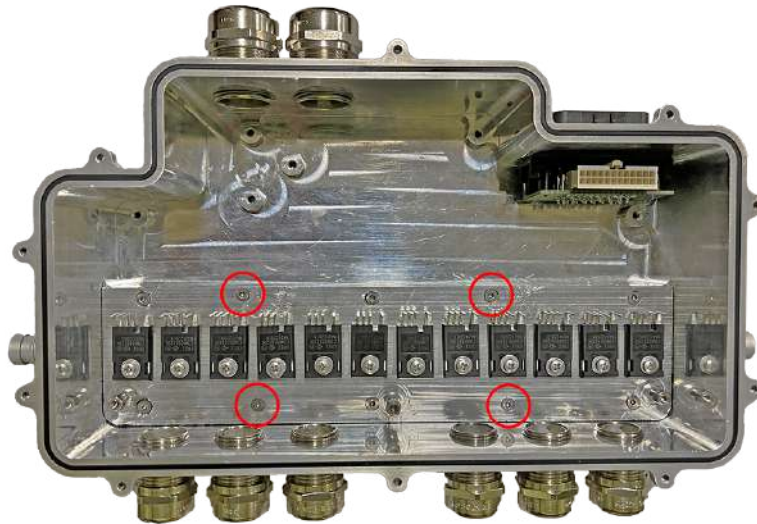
Assembled MOSFETs and heat sink showing additional bolt fixtures.
